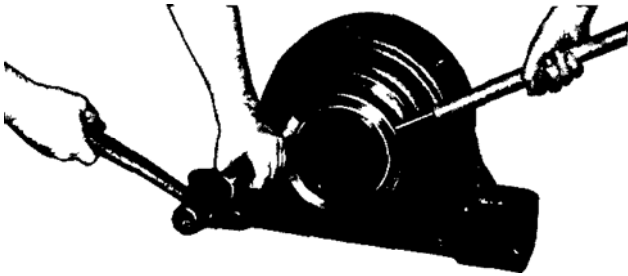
PREFERRED METHOD – Hitting directly on face of adapter nut, with brass bar parallel to shaft, while applying torque with barring rod to tighten nut. ♣
